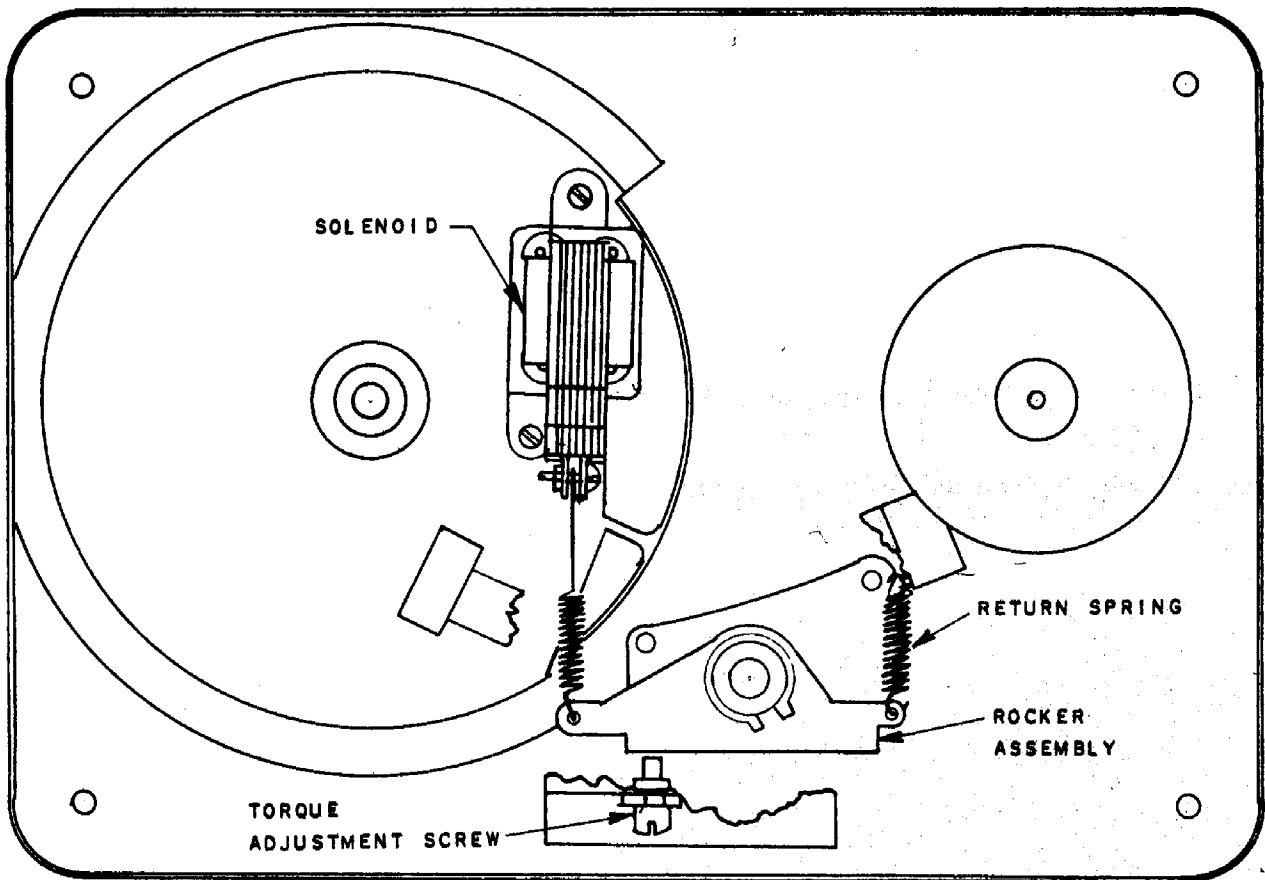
ACTION OF ROCKER ASSEMBLY
